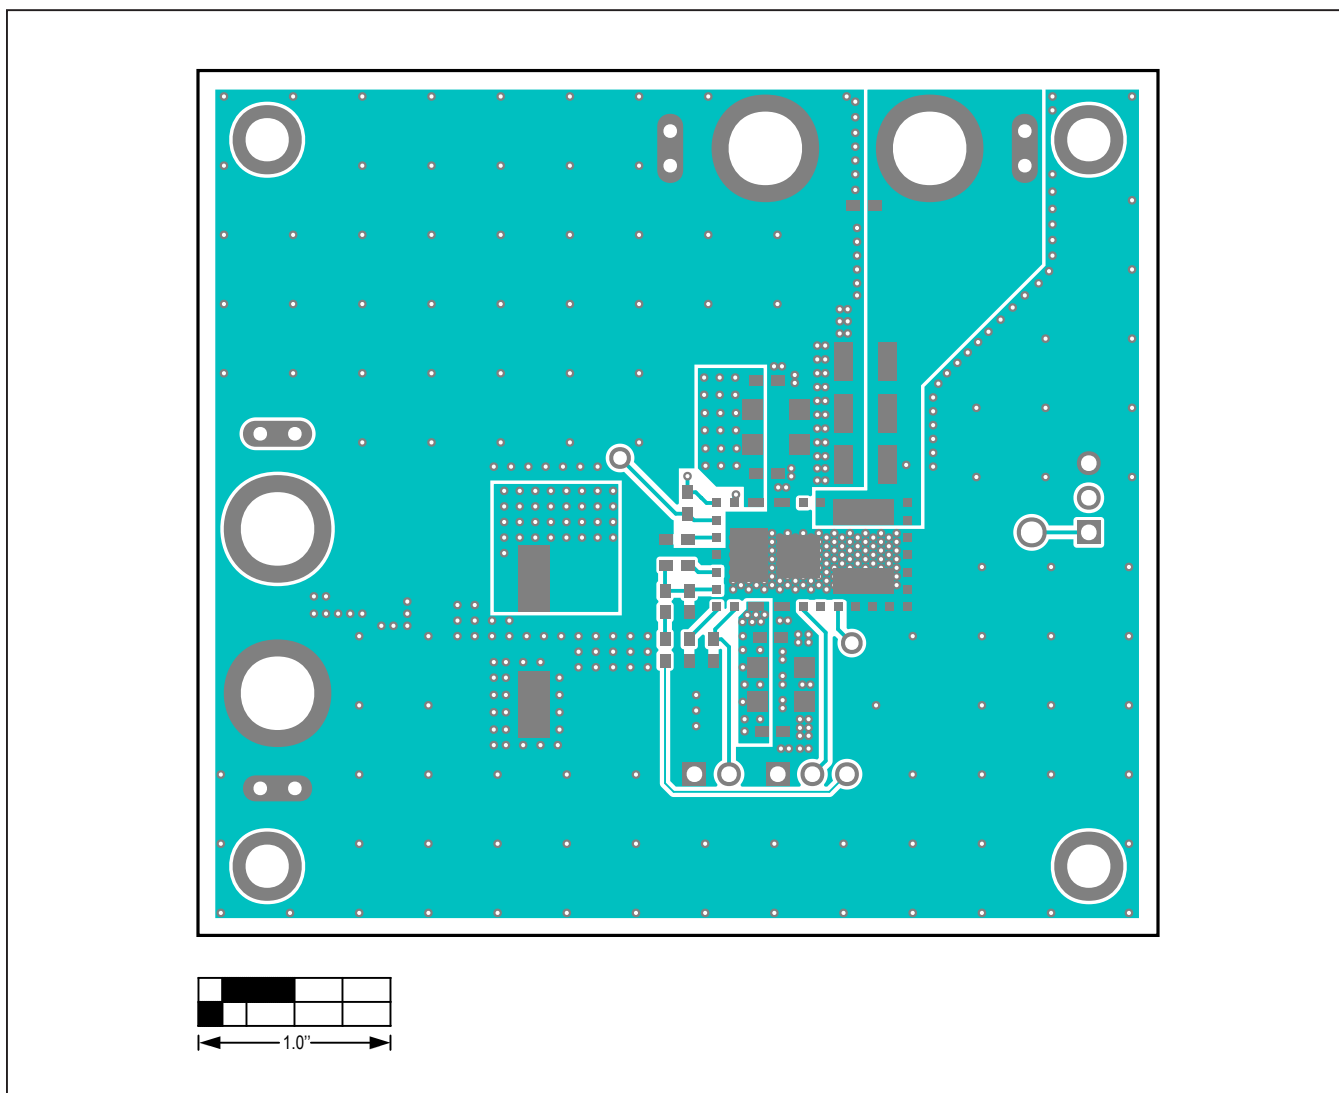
MAXM17546EVKITBE# 5V Output EV kit PCB Layout—Top Layer
